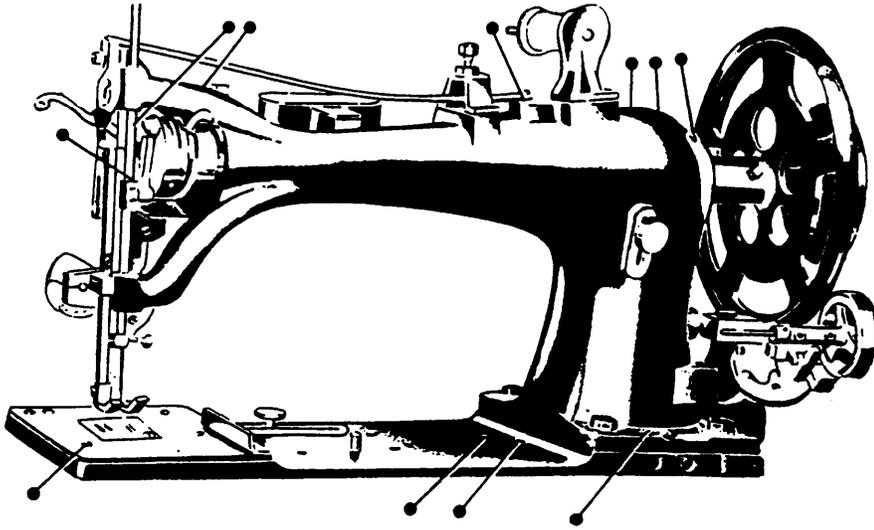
Oiling points at the front of the 7-33 sewing machine.
